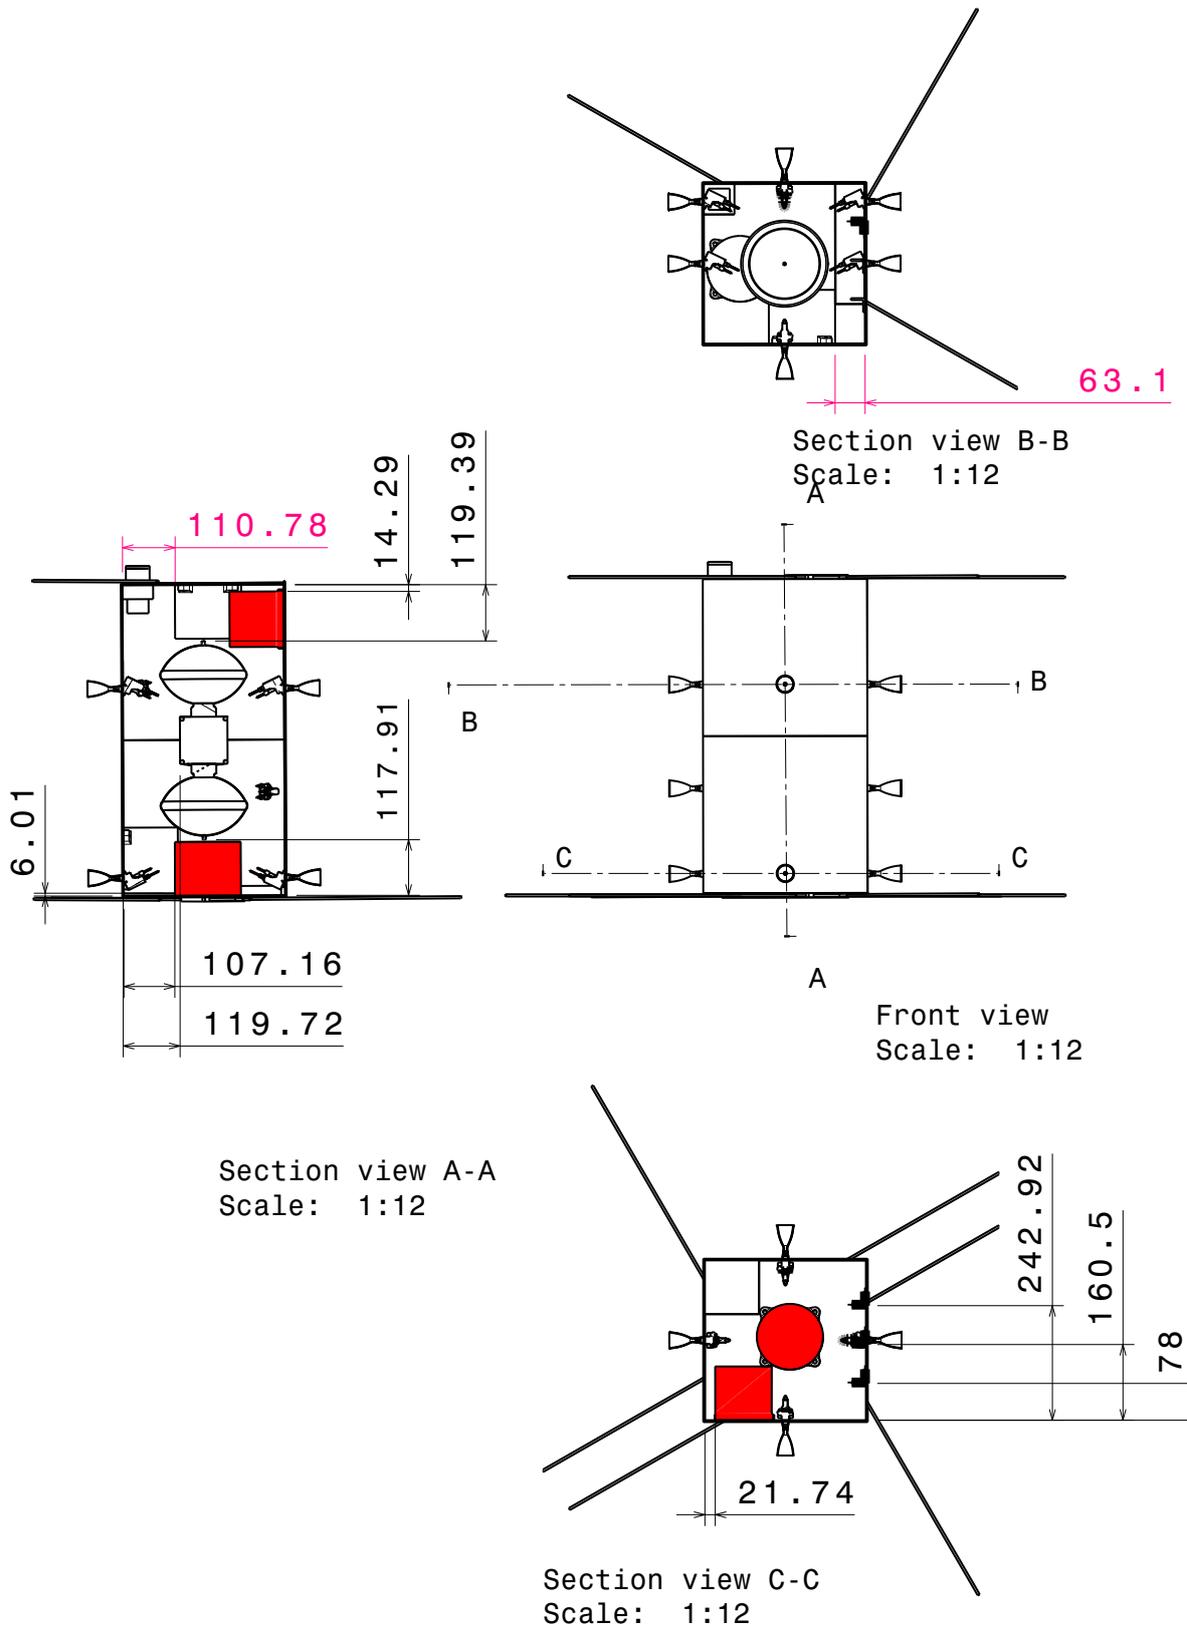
Technical Drawing of the Components Inside the Spacecraft Bus.
